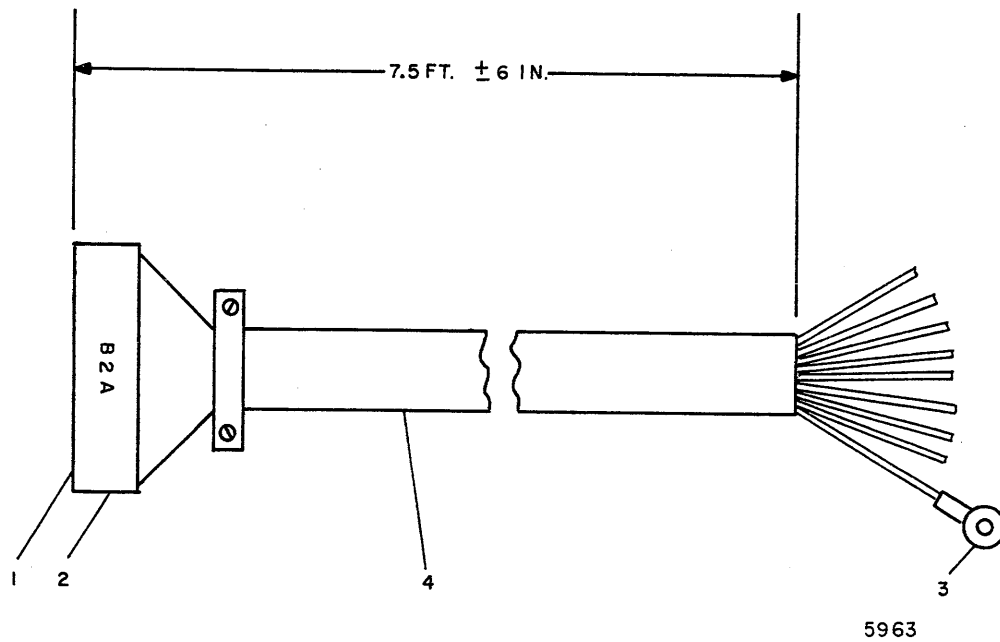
Cable Assembly, Power, Electrical, Type 316-01
